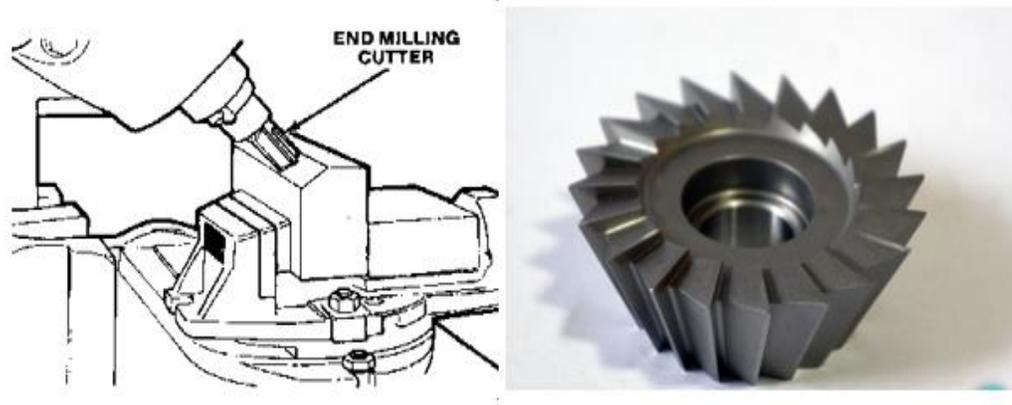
Angular face milling (left) and Single angle Milling head (right).
